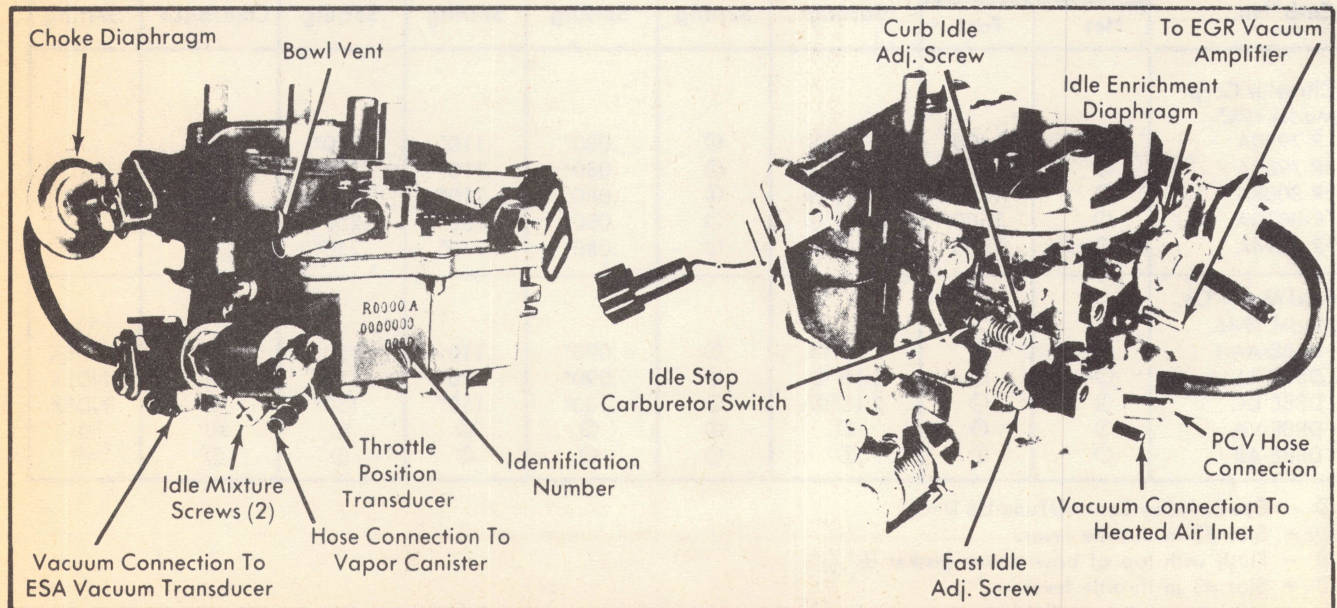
External Views Of Holley 2245 Carburetor Showing Vacuum Pickup & Major Adjustment Locations
